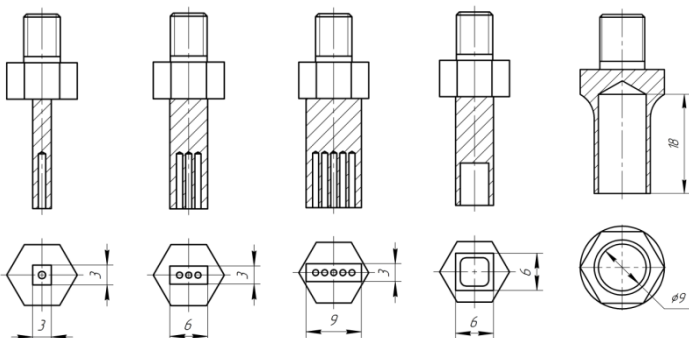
Passive working tools for specifically drilling of complicate shape bores
